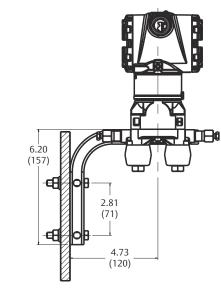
Rosemount 3051C Coplanar Flange with Rosemount 305RC3 3-Valve Coplanar Integral Manifold
